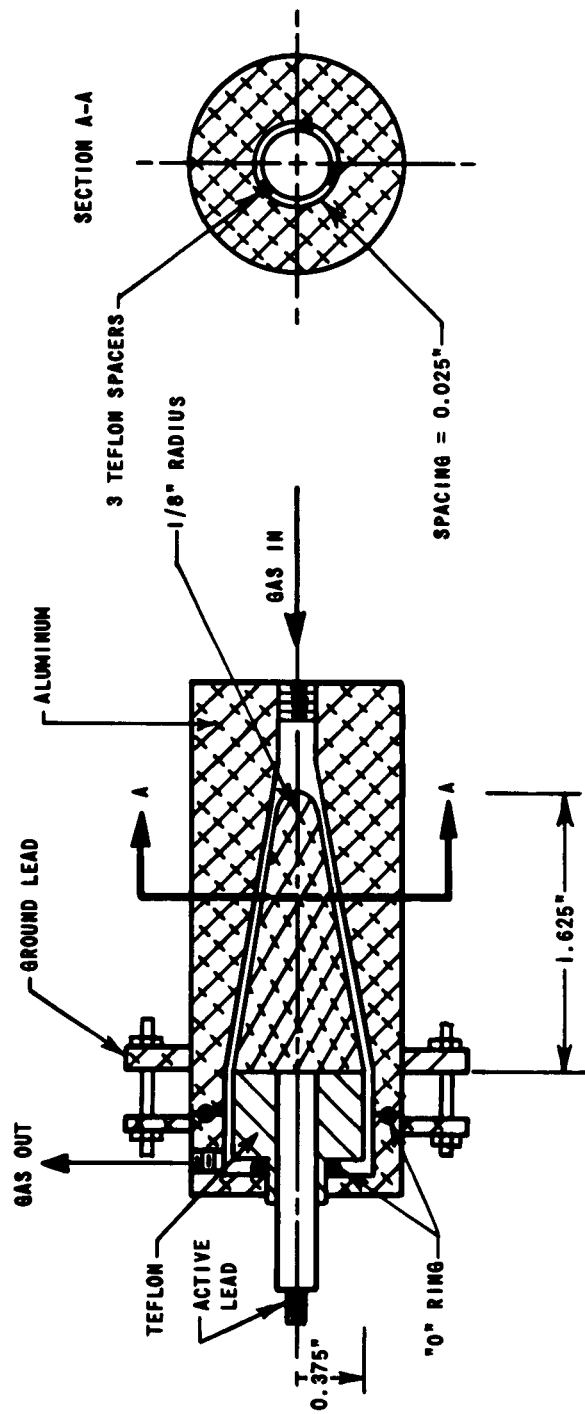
ASSEMBLY DRAWING OF CAPACITOR
